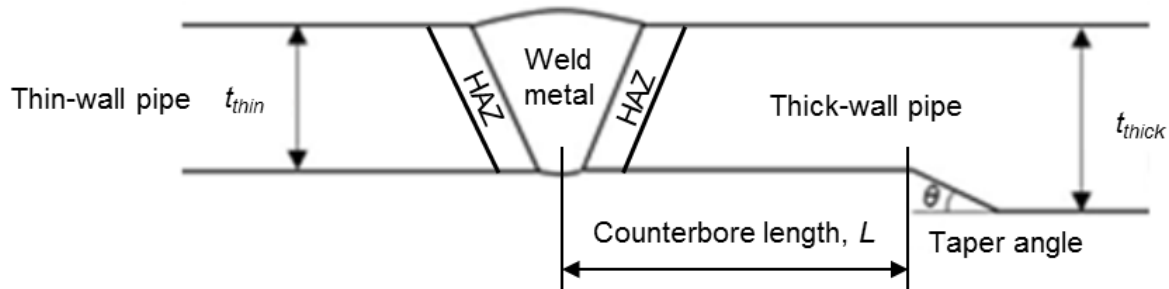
Joint design of transition welds - counterbore-tapered design
